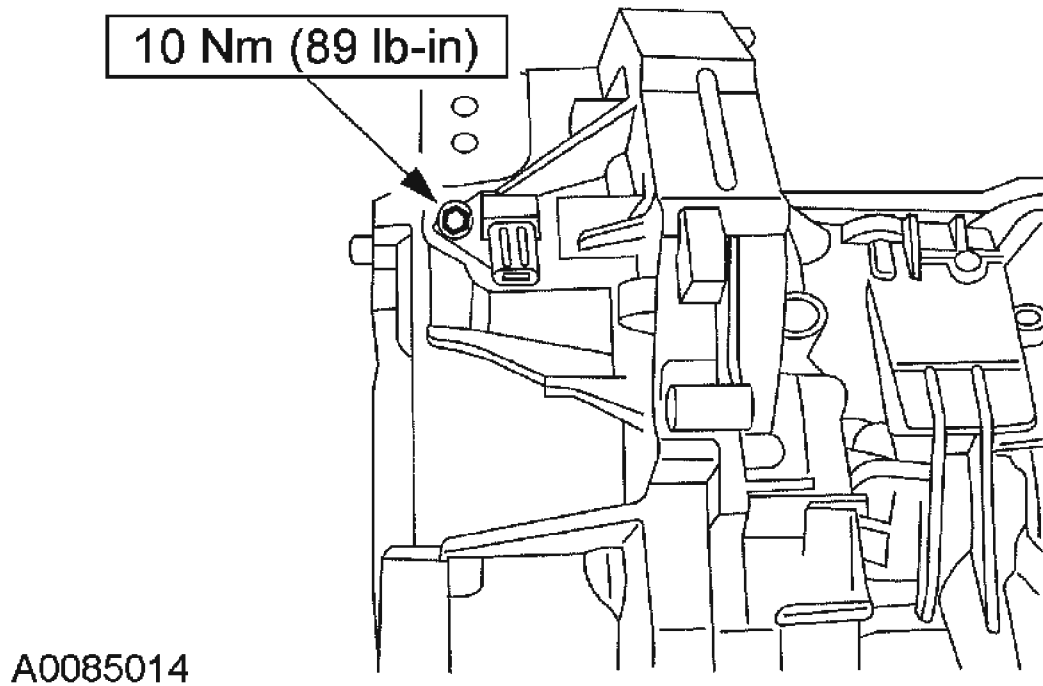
Tightening Output Shaft Speed (OSS) Sensor Bolts
